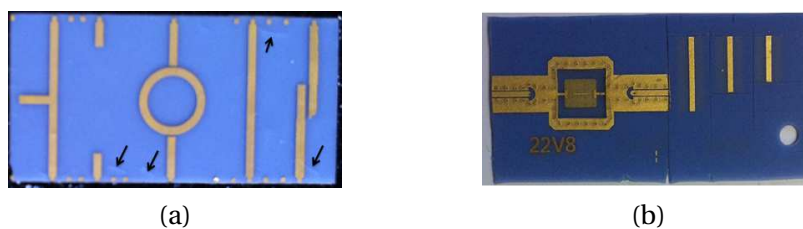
Cut of fired LTCC circuit: (a) Using a laser machine. (b) Using a heated blade before firing
